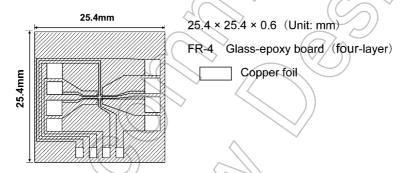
Device Mounted on a Glass-Epoxy Board (b)
